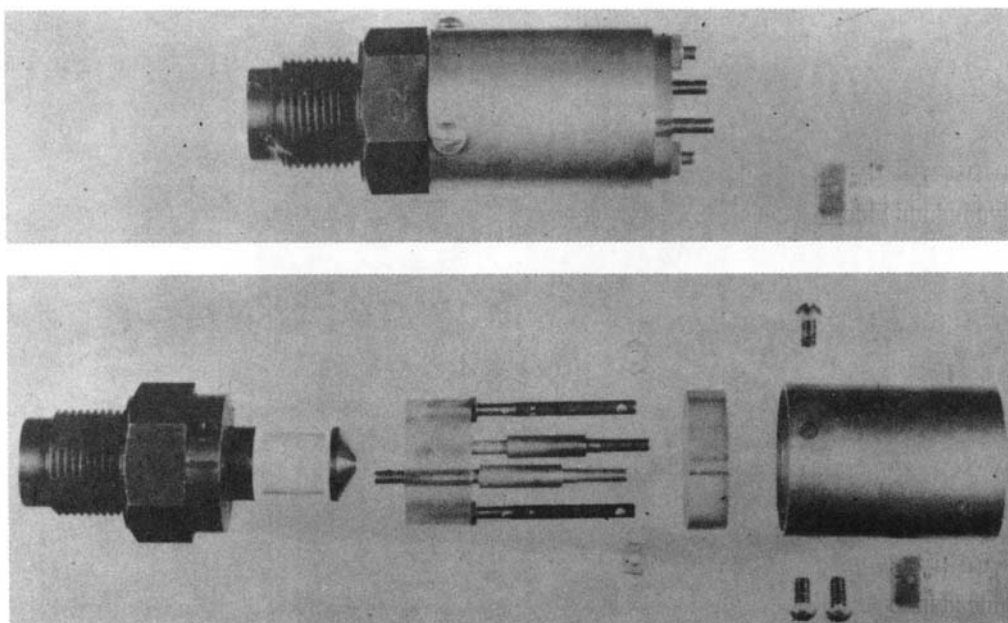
Pressure strain gauge, assembled (top) and disassembled (bottom).
